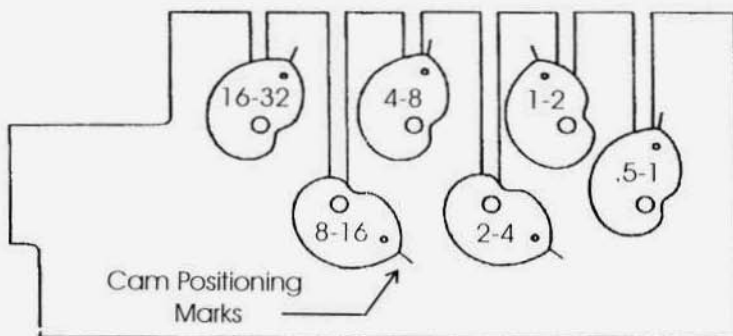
Cam & intermittent switch shown from front in 7+000 position.
